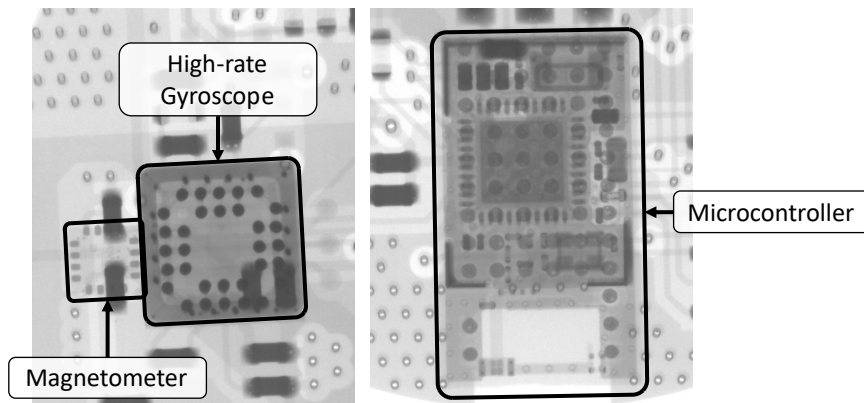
X-Ray results showing the soldering of the leadless components.
